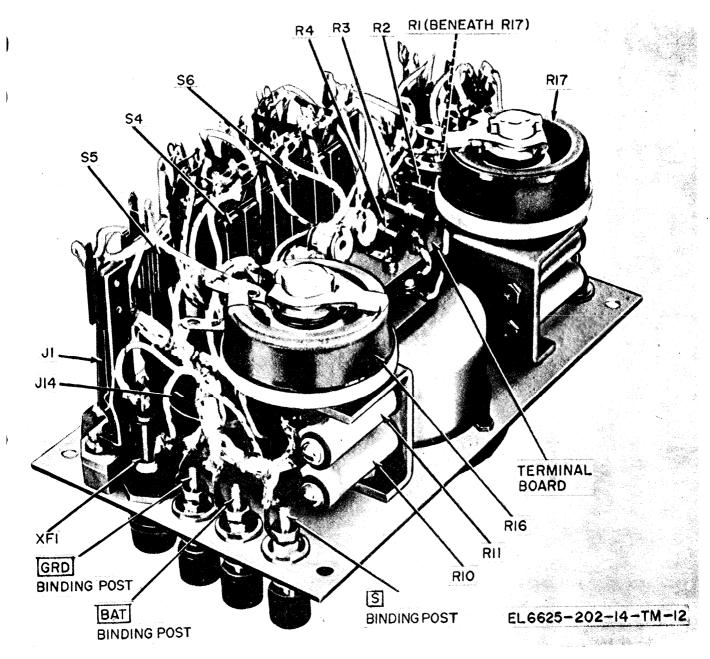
TS-1775/U, left oblique bottom view of mounting panel removed from case.
